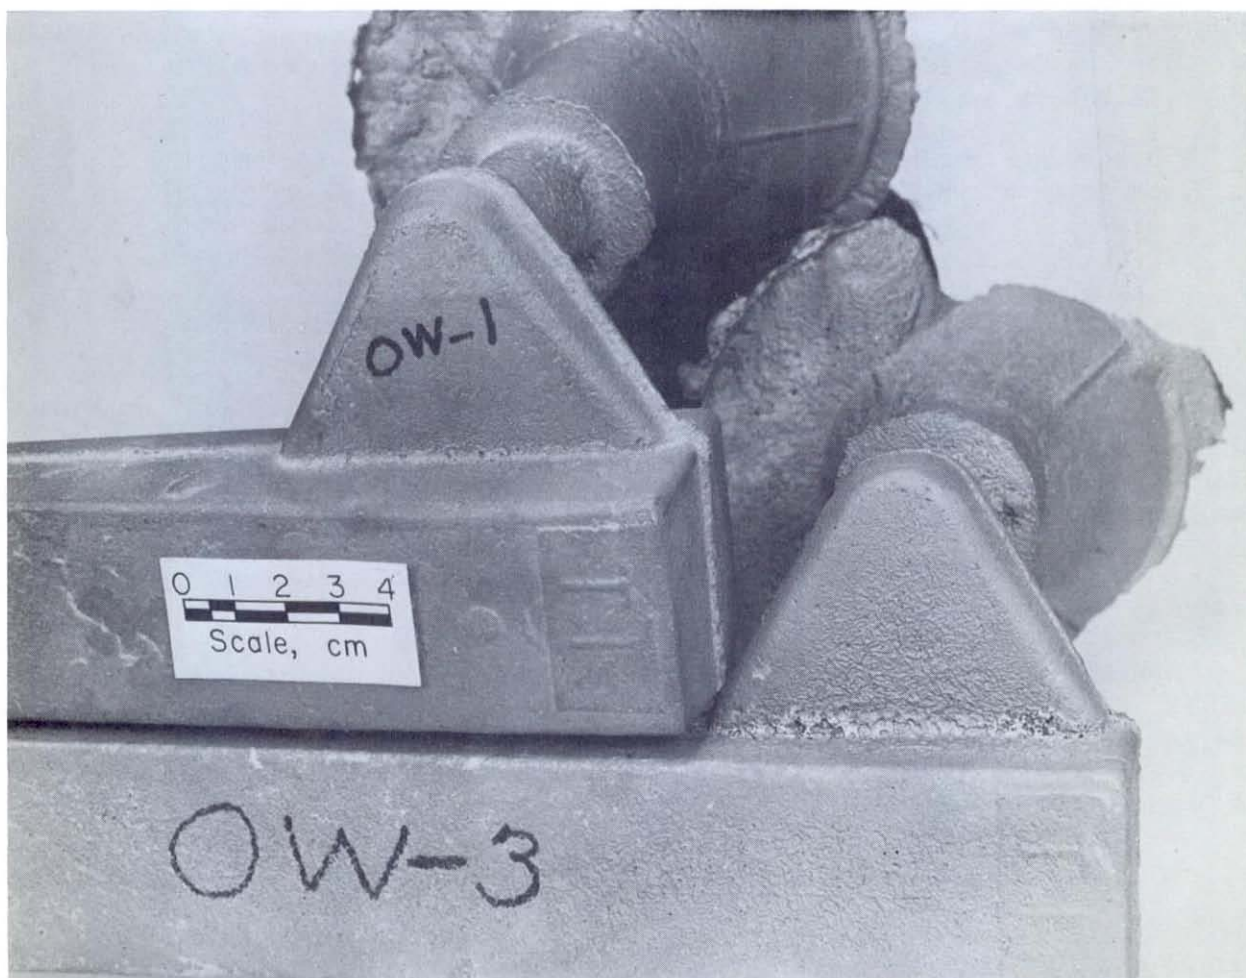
Drag surfaces of two inductoslag cast wedges poured in unwashed olivine molds. Note hot-cornering defect on bottom casting at the juncture of gate and casting.
